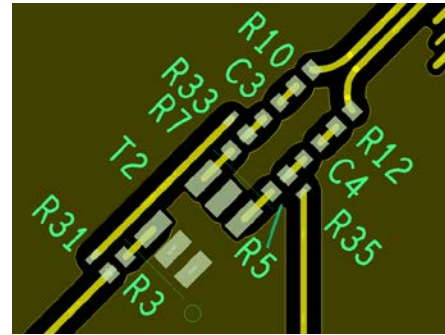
Layout of Channel 2 Input Showing Pad Locations
